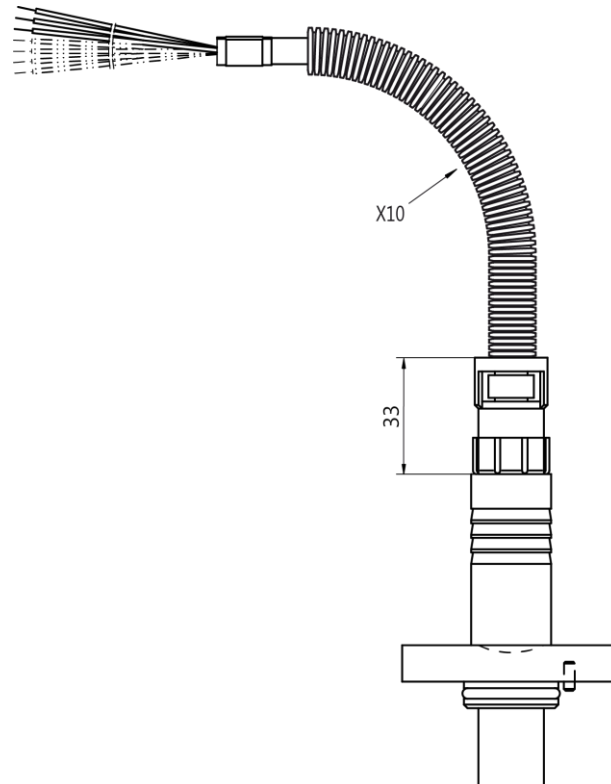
/22: Cable protection corrugated pipe (X10 = ca) (exemplary)
